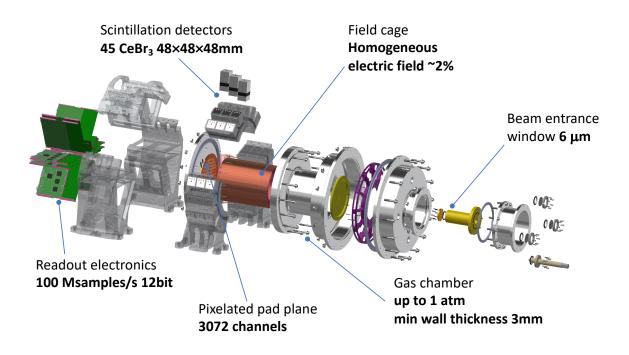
Exploded view of the SpecMAT detector with indication of the main components.
